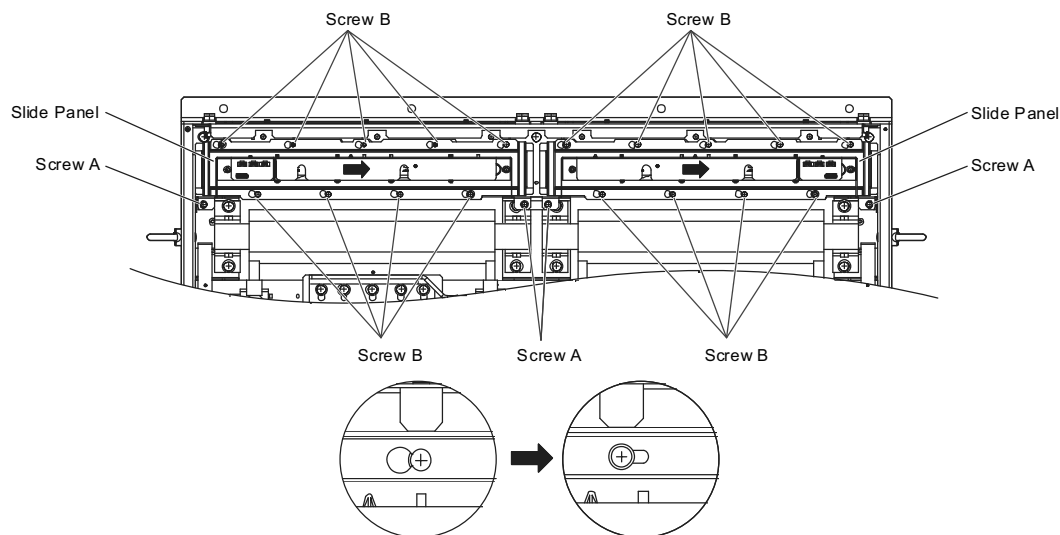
Removing the Fan Unit: 4A0930 and 4A1200
